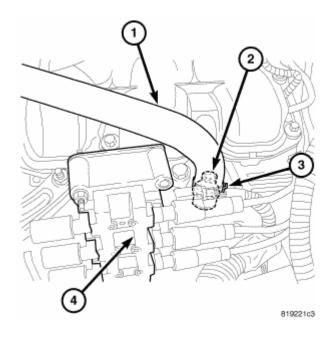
Throttle Body 3.8L Courtesy of CHRYSLER LLC
